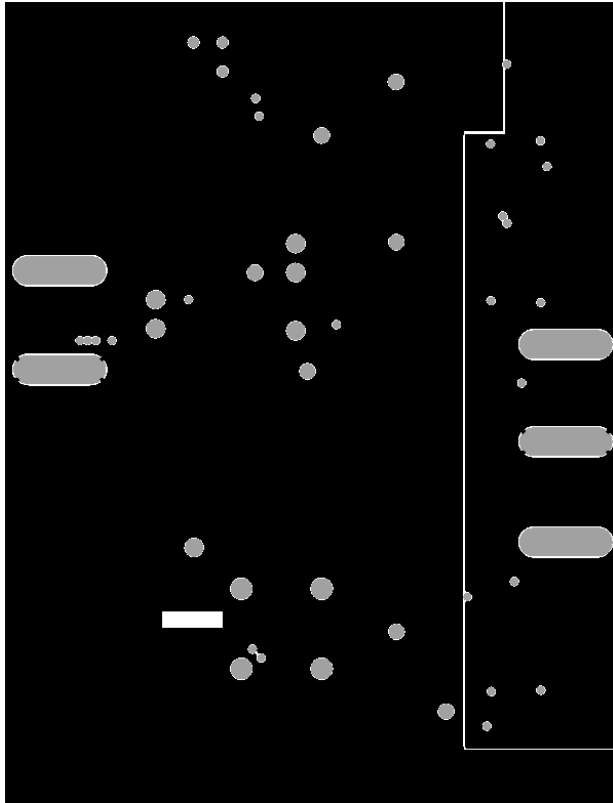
MAX3901 EV Kit PC Board Layout - Ground Plane
